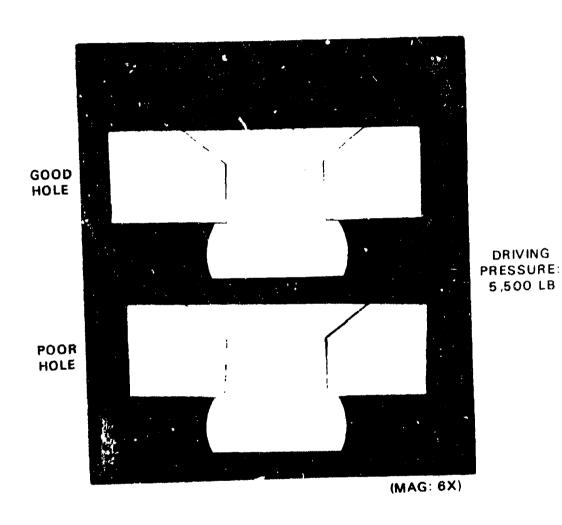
Photomacrographs of Sectioned 3/16-in. Dia. 7050-T7X Rivets 2nd Step Aging: 8 Hrs. at 350°F
